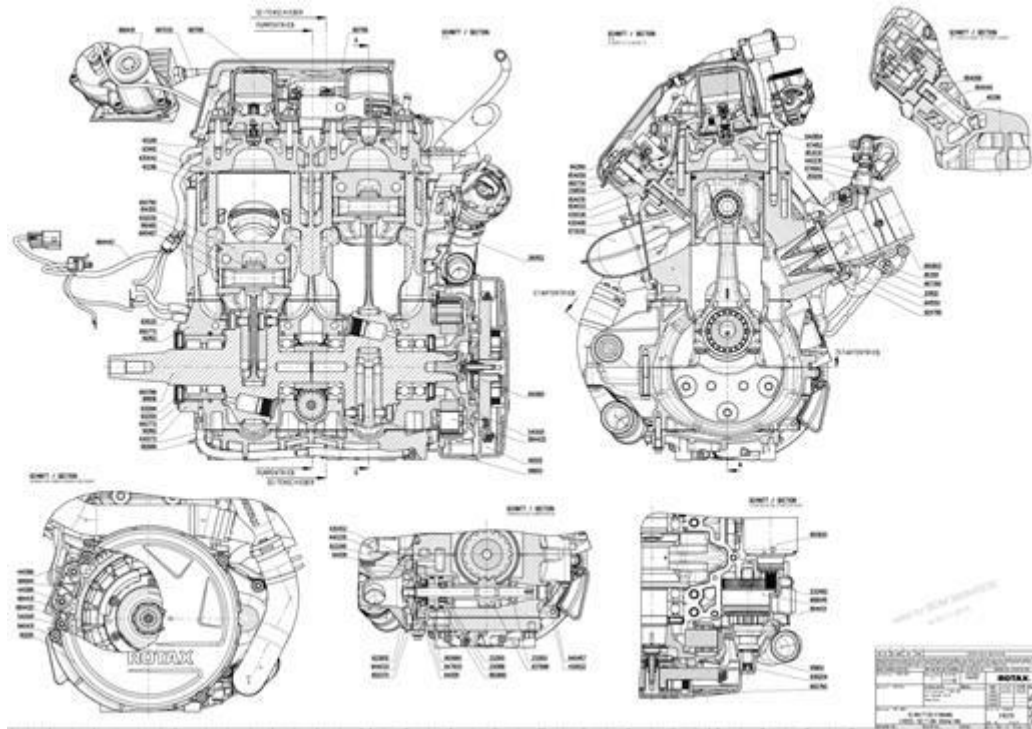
Rotax 850 E-TEC engine - sectional drawing
